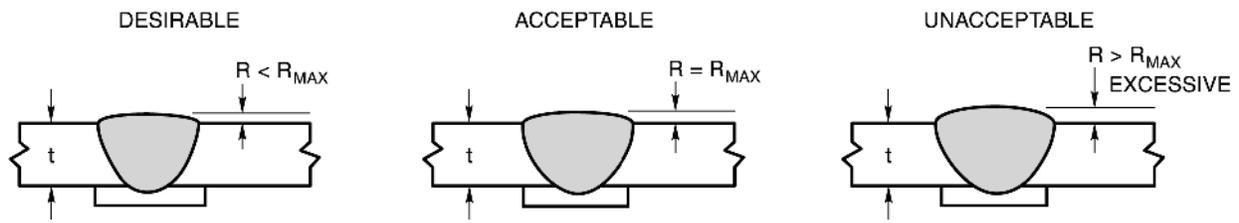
FIGURE A – WELD PROFILES FOR BUTT JOINT REQUIREMENTS (see Tables 2 and 3)
